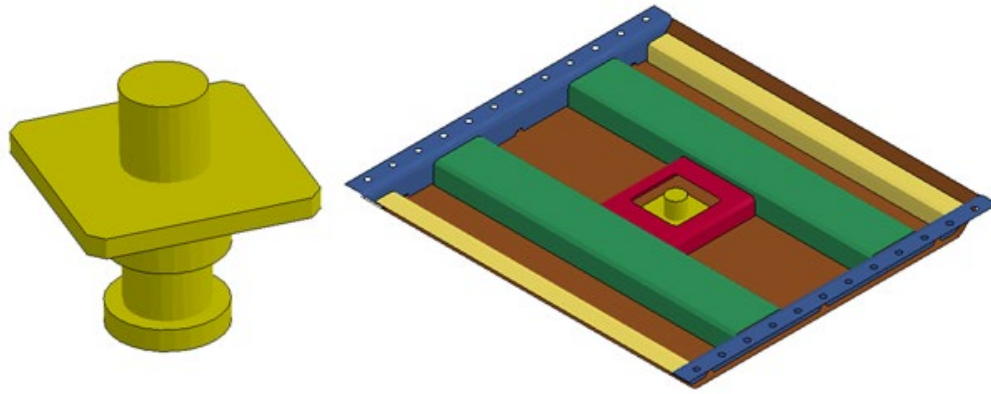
Fifth Wheel Shear Pin and Load Frame
